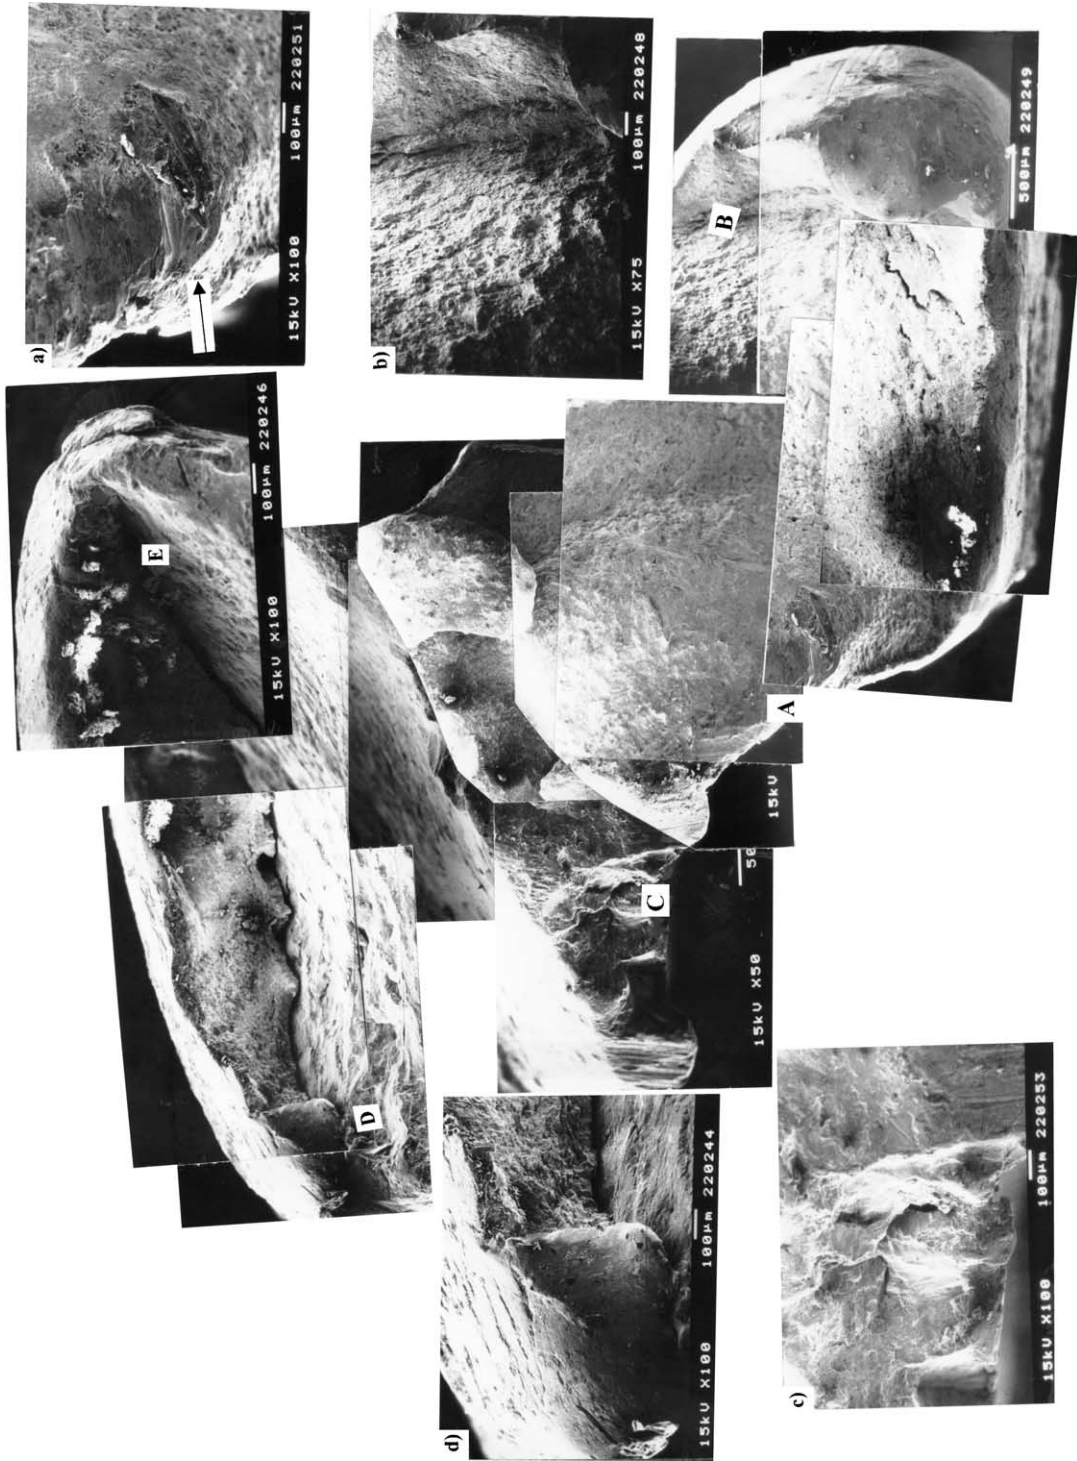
SEM fractograph as a montage showing details of fracture of sample PSI. Regions A, B, C, D in the montage are shown in a detailed view in (a), (b), (c) and (d). Region A is origin. B refers to secondary cracks. Arrowhead shows the crack front developing as circular lines from the origin A.
